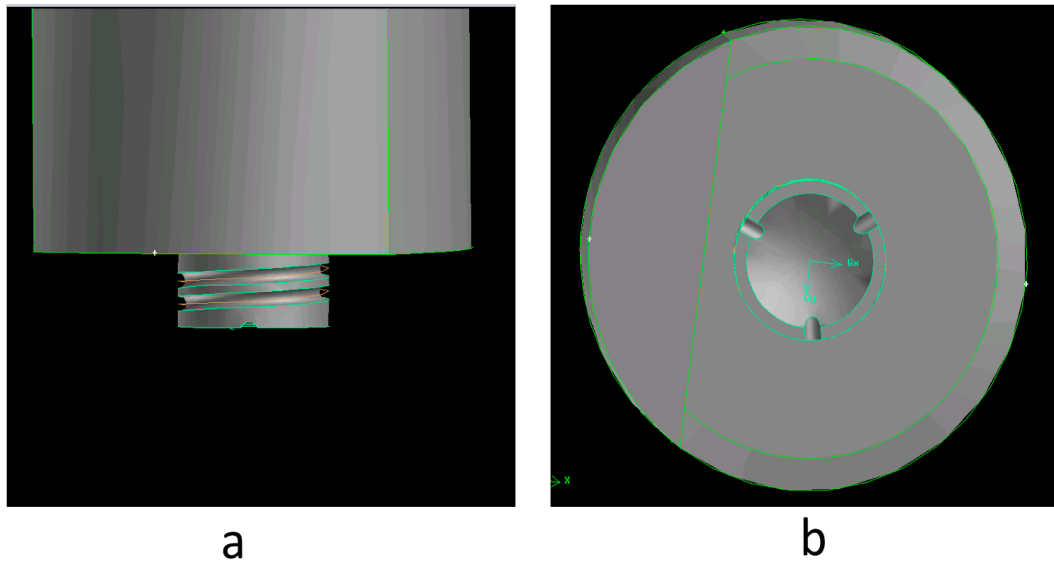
a) CFD tool pin vertical profile b) CFD tool pin horizontal profile (bottom - up)
